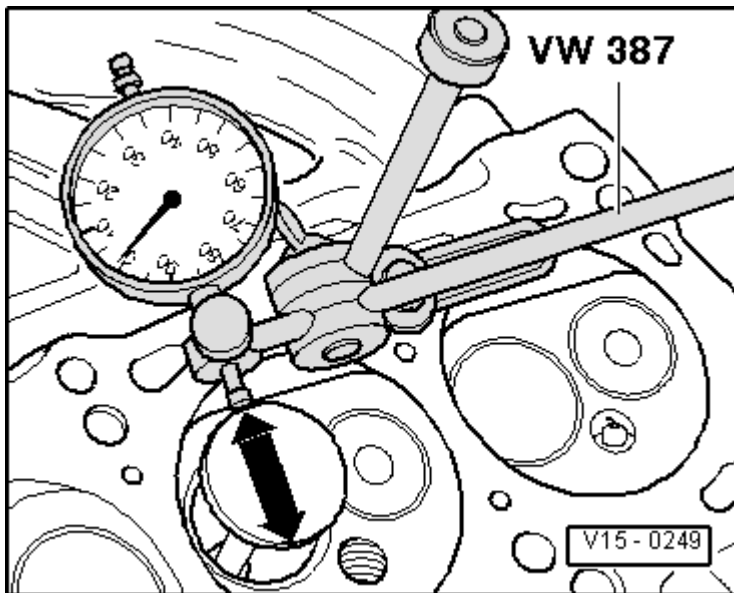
Identifying Dial Gauge Holder -VW 387- To Determine Tilt Clearance
